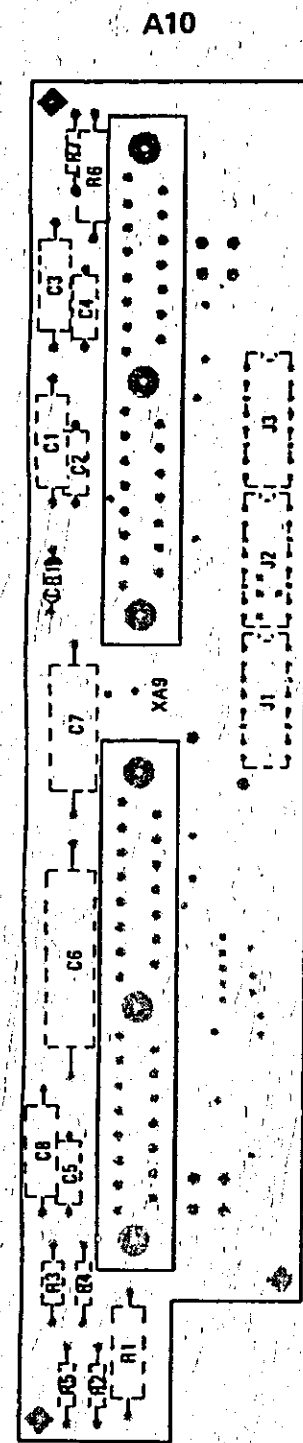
A10 Front Interconnect Assembly, Component Locations
